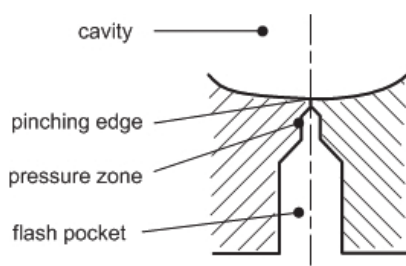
Geometry of pinch-off section in an extrusion blow mould [1]
